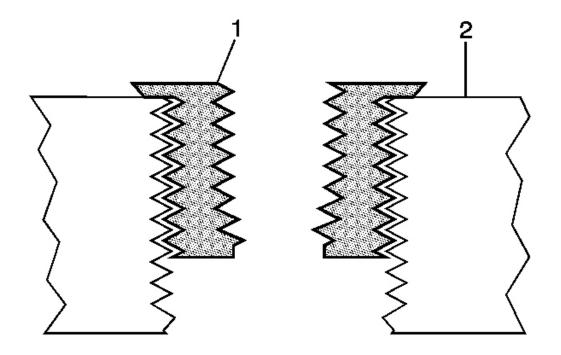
Inspecting Insert For Proper Installation - Tapered Thread Courtesy of GENERAL MOTORS CORP.
